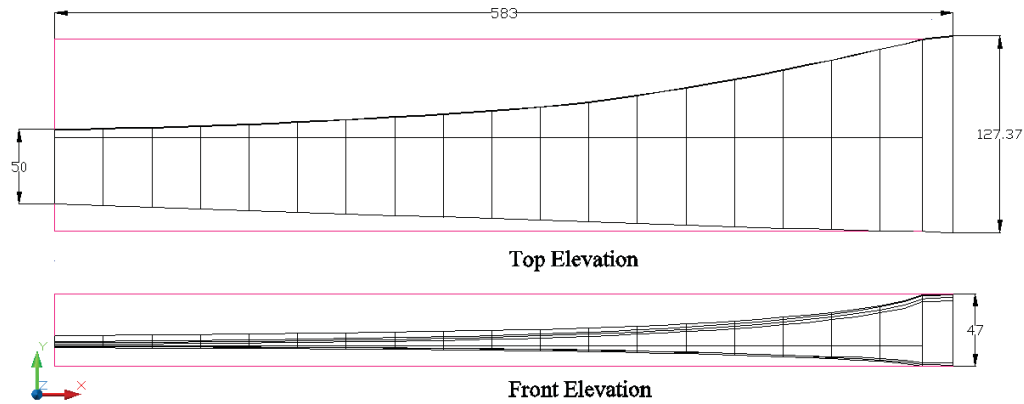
Outline of dimensions on wooden block for blade manufacture
